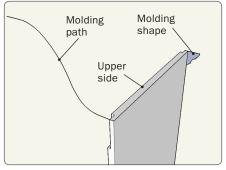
Attach the molding shape to the carcase side, then draw the ogee curve path for the Follow Me tool.
